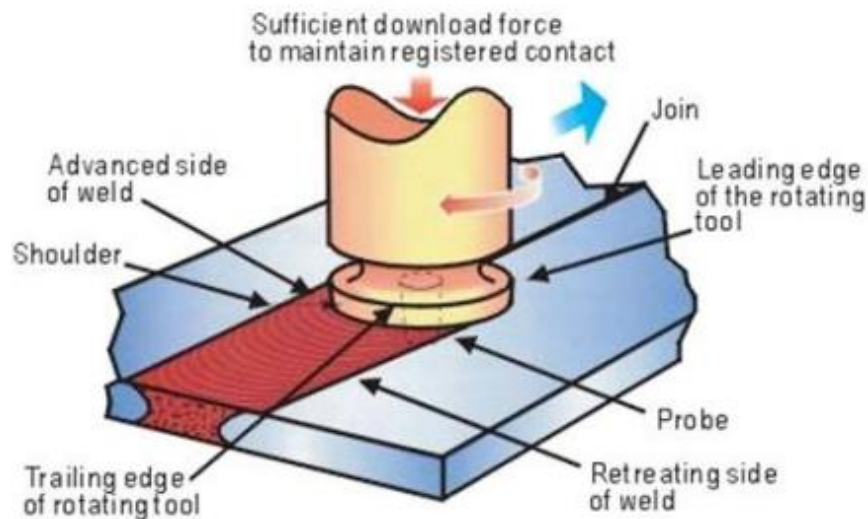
Friction stir weld diagram showing typical process parameters. [41]
